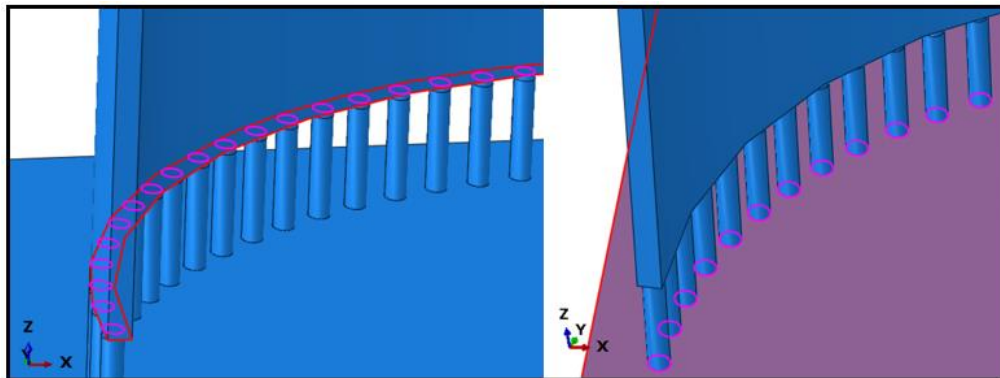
Part contact surface (left) and build plate contact surface (right) in pink.
